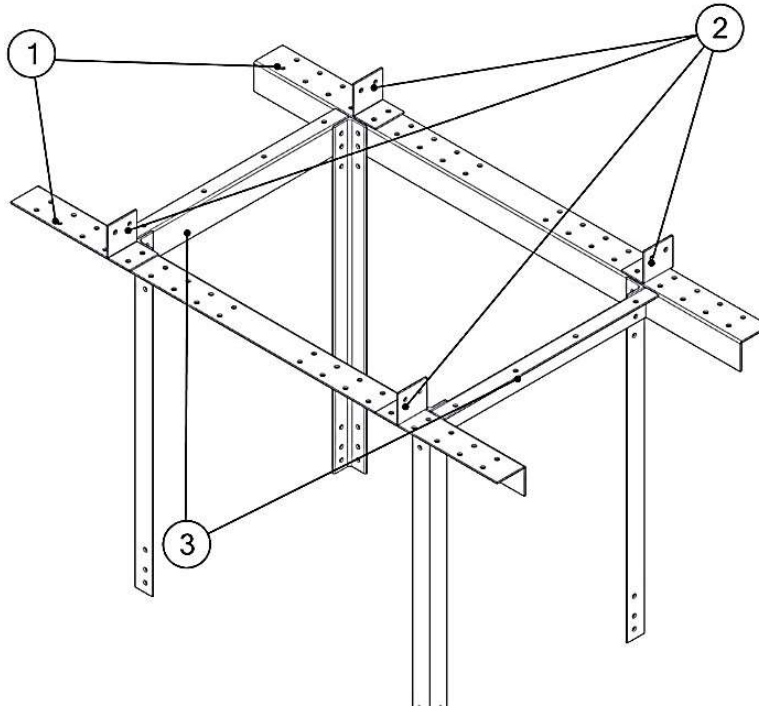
Floor Support Column Insert Side Sheet
